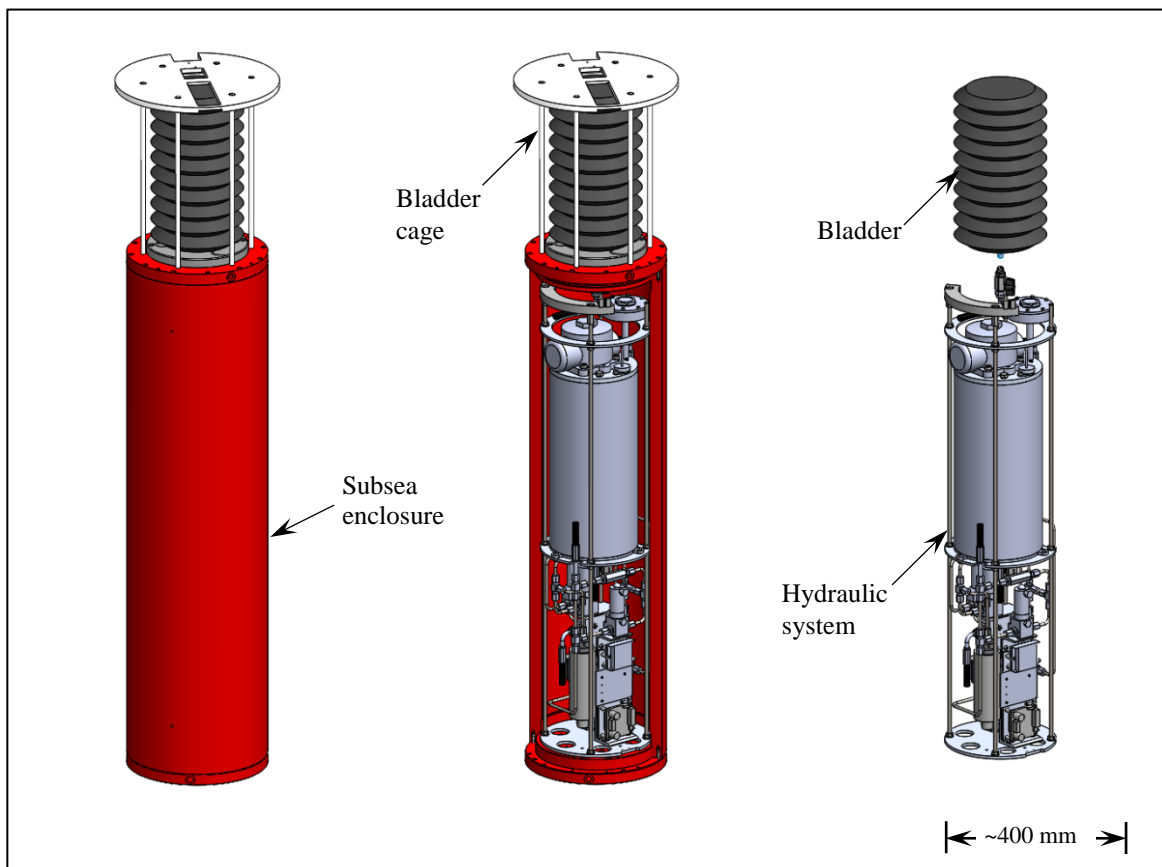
Buoyancy engine with enclosure sectioned and hydraulic system separate
